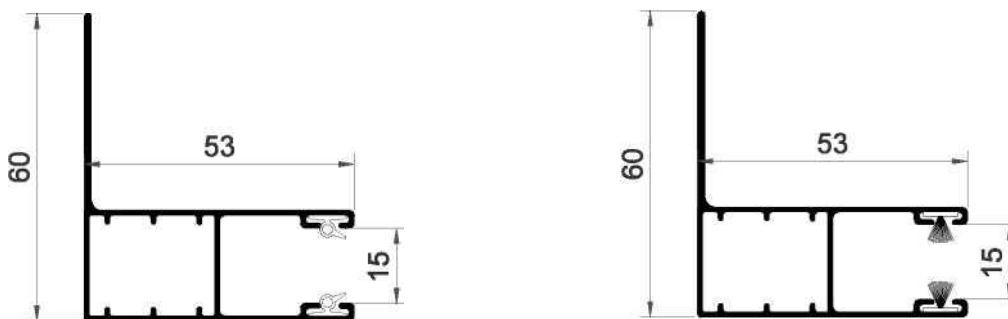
Cross-section side guide (PK53), with a bottom slat or brush seal
